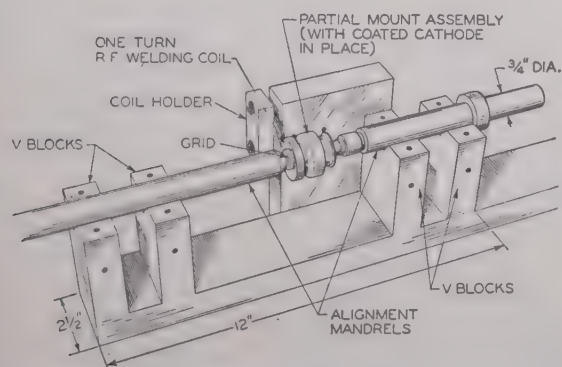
Jiggling equipment consisting of V-blocks and cylindrical mandrels.
